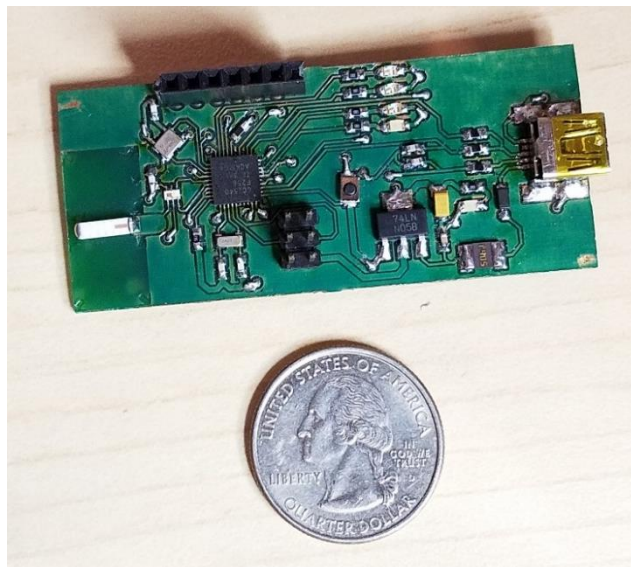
Prototype Breakout Design Testing of the Bluetooth Communication
